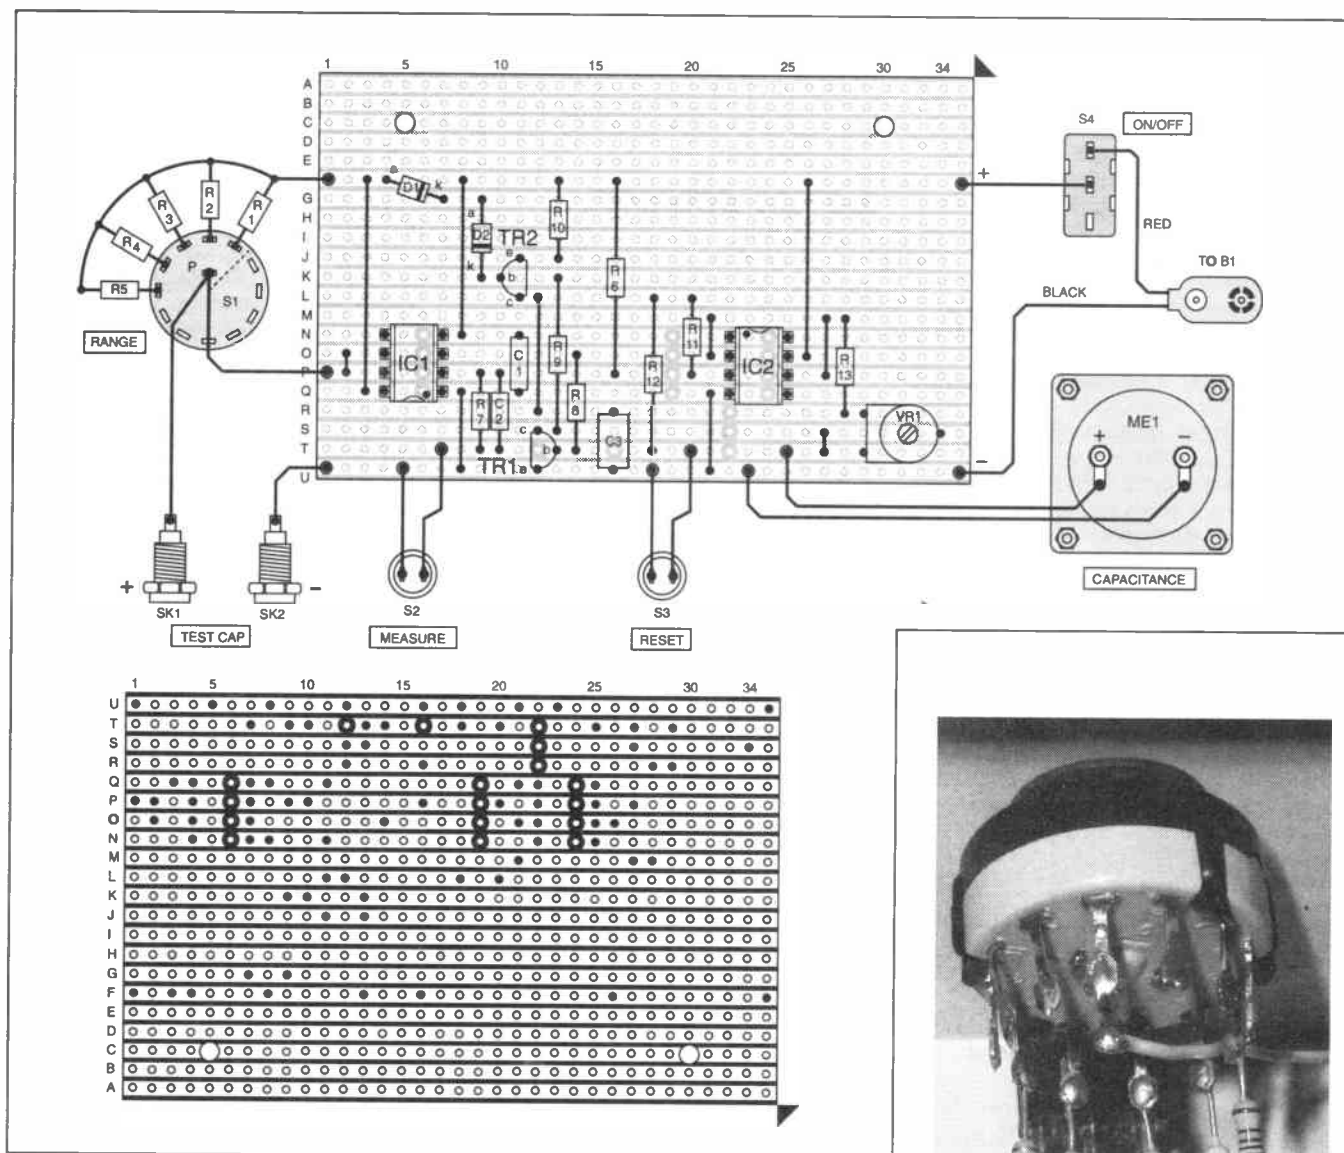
Stripboard component layout, interwiring and details of breaks required in underside copper tracks.
